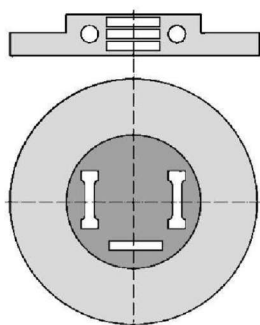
Position of specimens during tensile and impact tests, neck flange with section thickness $T > 50$ mm
